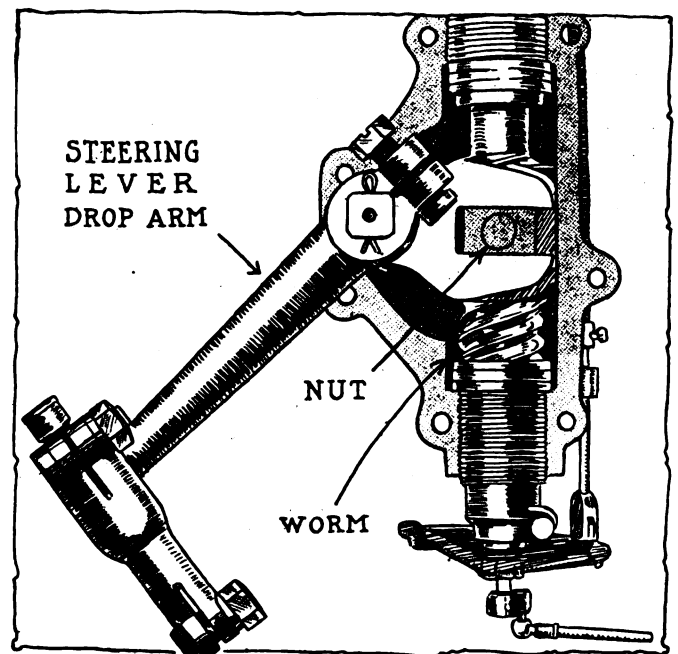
Irreversible worm-and-nut type of steering mechanism
